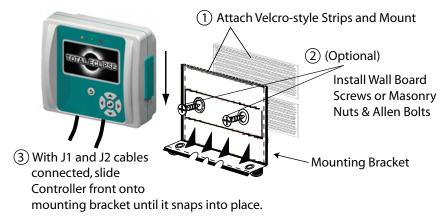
TOTAL ECLIPSE Controller Mechanical Installation
